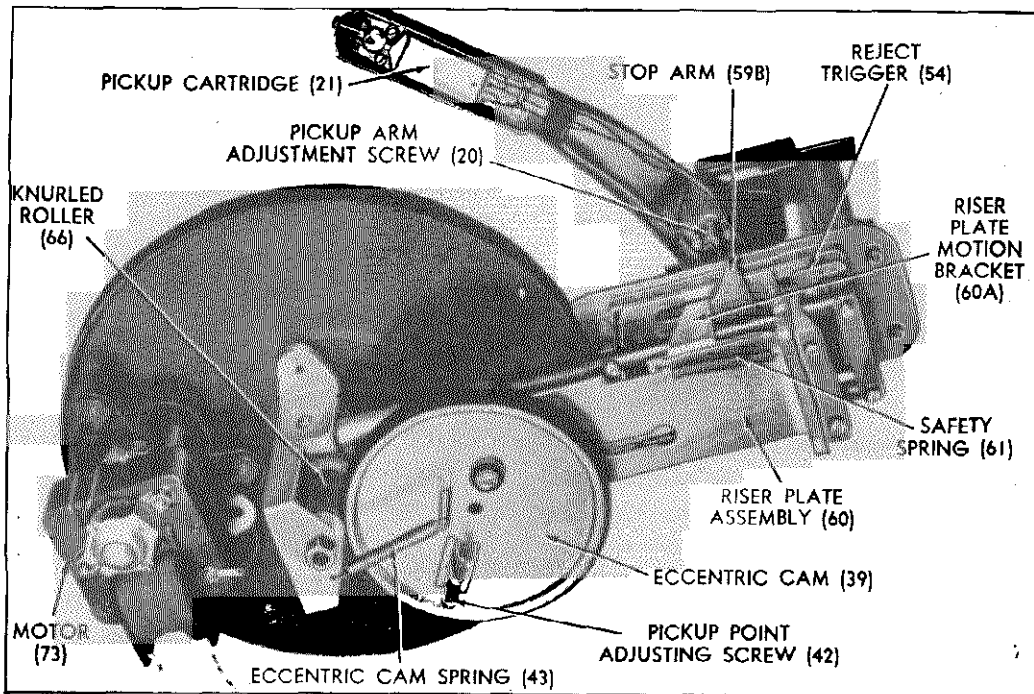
RECORD CHANGER, BOTTOM VIEW SHOWING LOCATION OF PARTS
